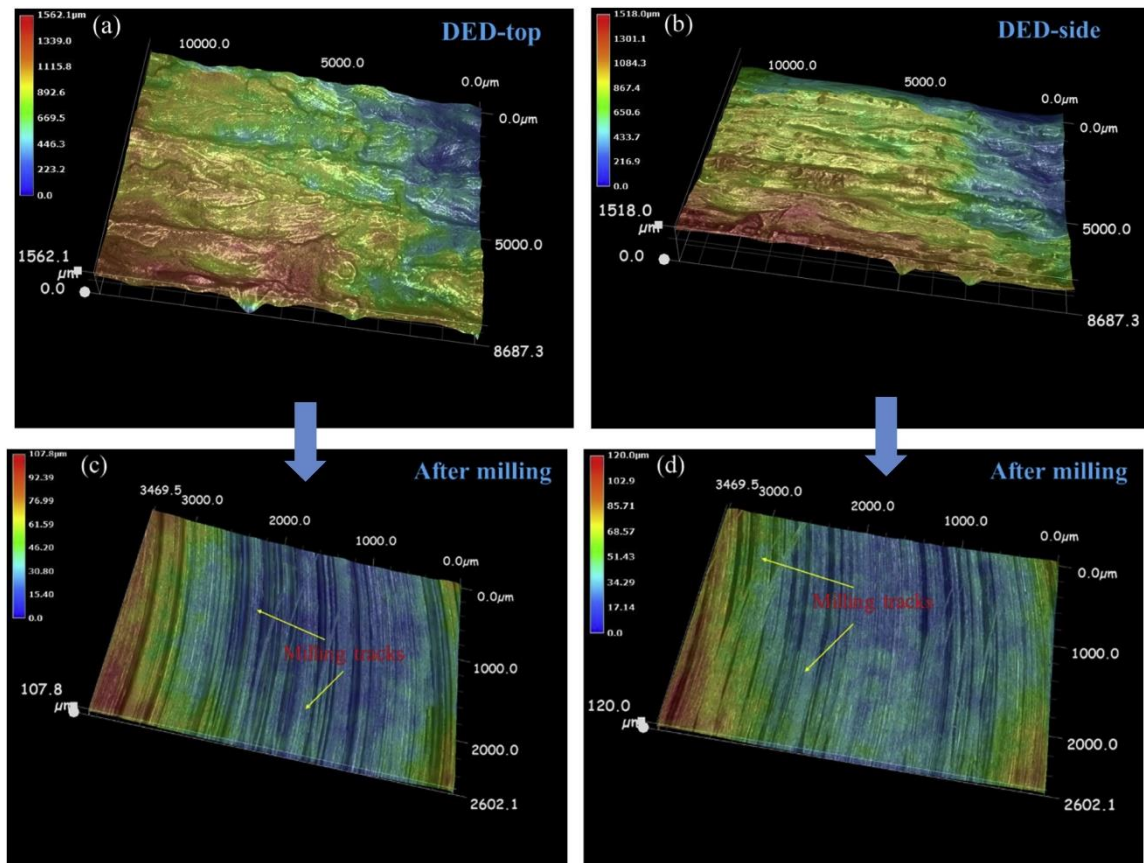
Surface morphology of AM samples (a) top surface before milling, (b) side surface before milling, (c) top surface after milling and (d) side surface after milling [92]; with permission from Elsevier.
